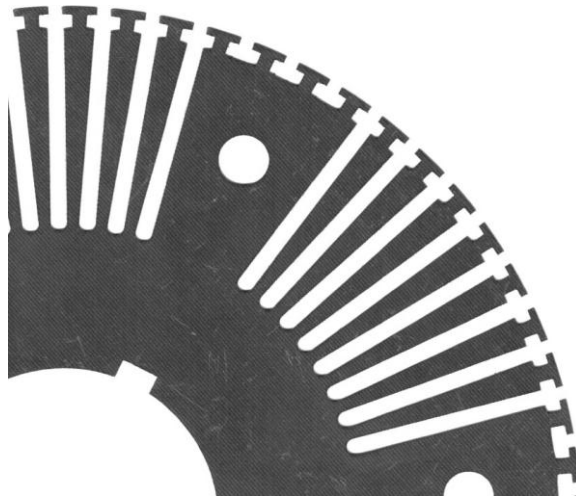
Part of the sheet of the cylindrical-rotor of the prototype main generator
